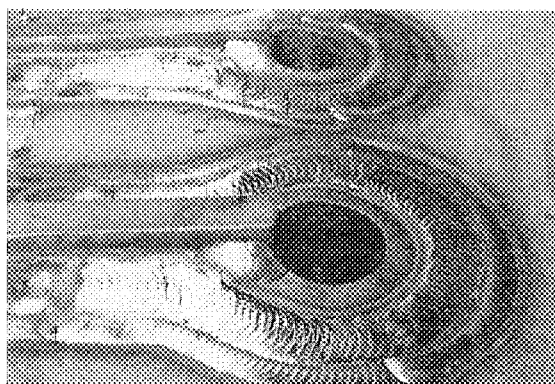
Appearance after TIG welding of top header plates
